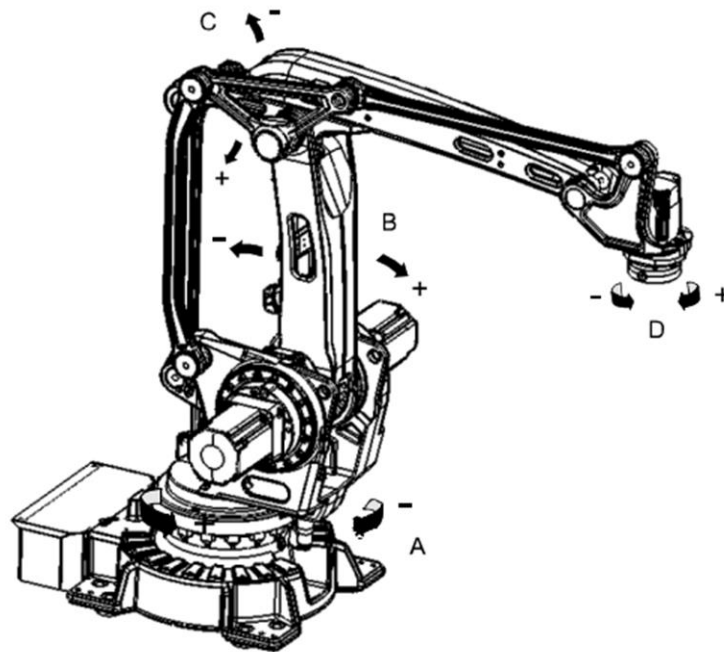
The IRB 460 manipulator has 4 axes(joints) as shown
